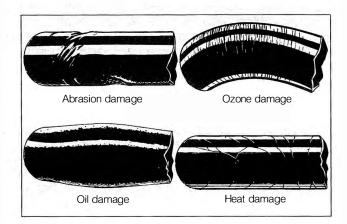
Examples of damage to coolant hoses. Any of conditions shown is cause for replacement.
